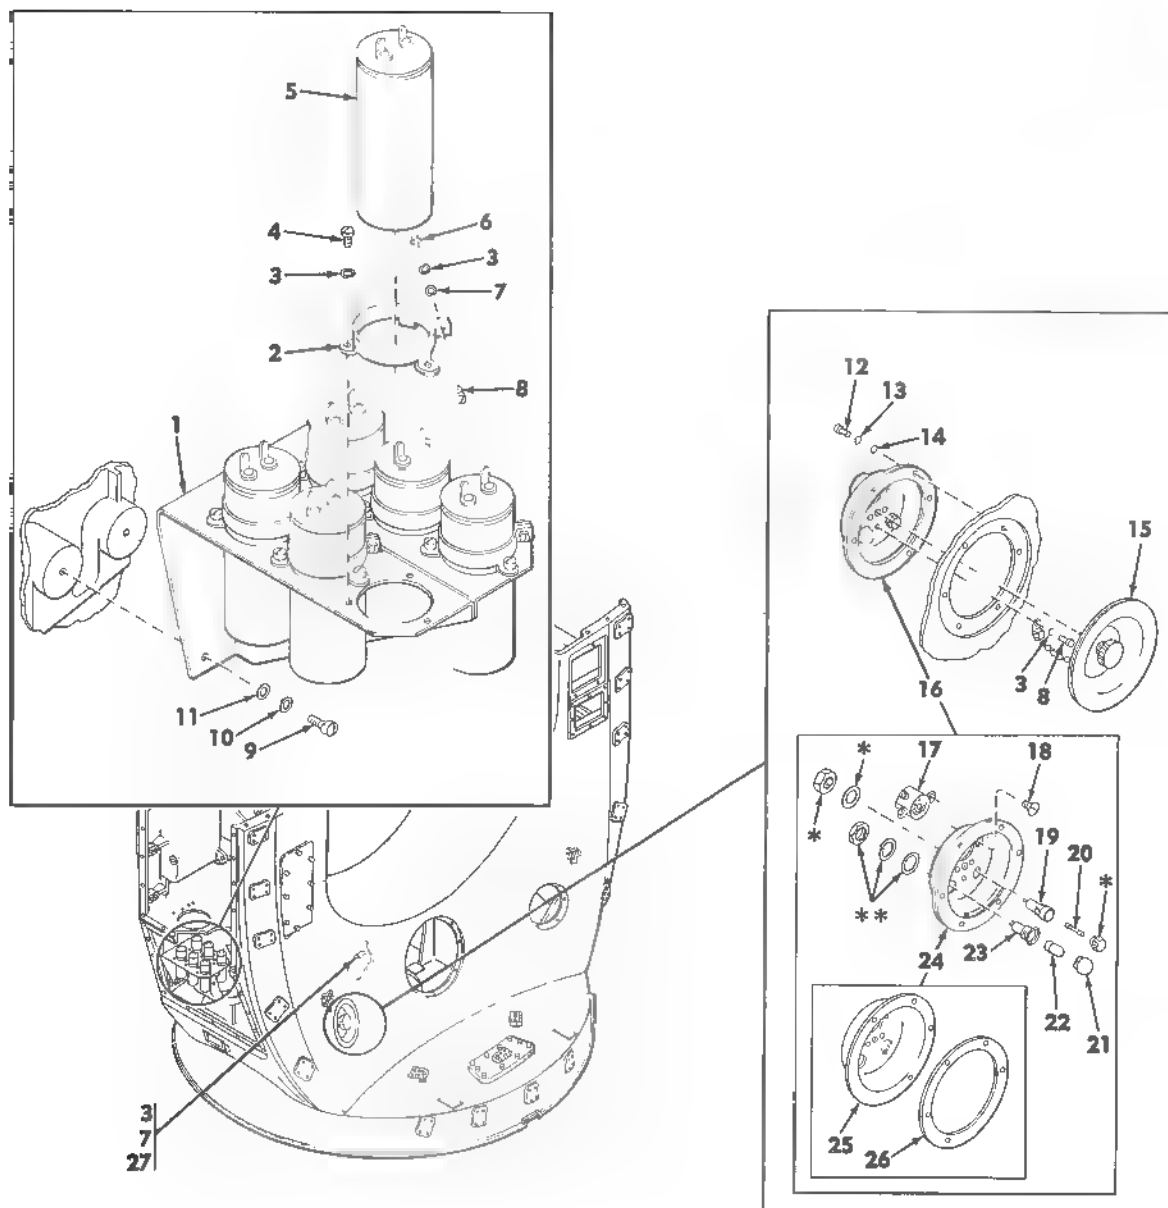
PEDESTAL, ANTENNA 78171625/-PARTIAL EXPLODED VIEW
